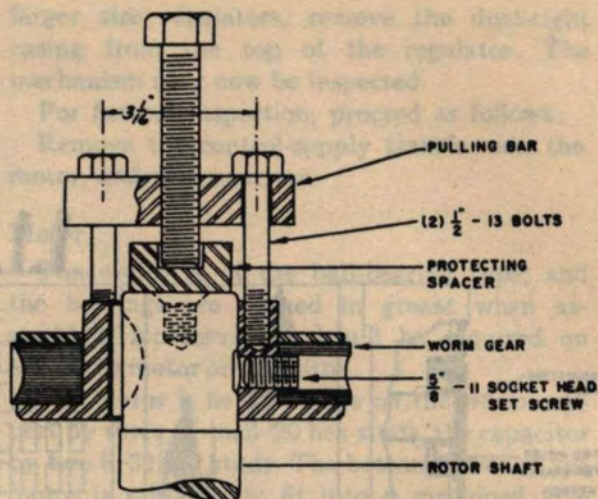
Method used to remove worm gear, typical of large kva-size regulators
